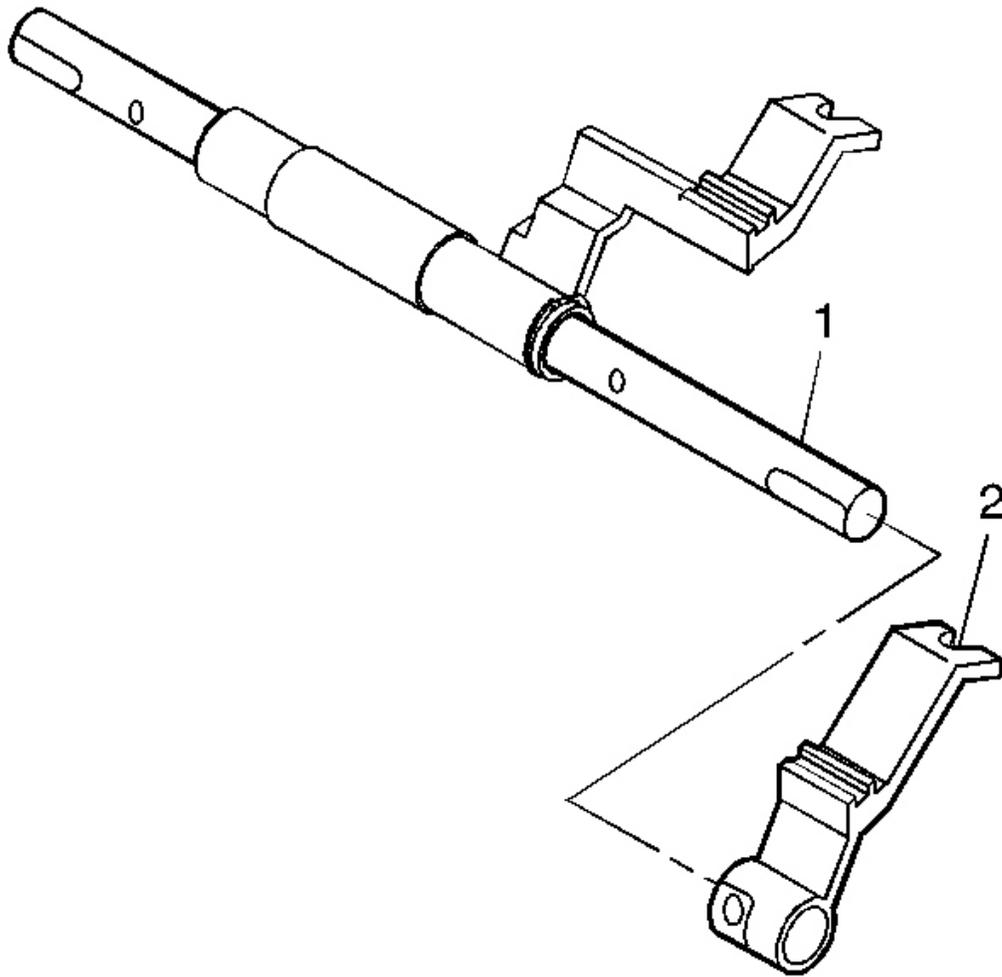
Installing/Removing Reverse Shift Lever Onto Shift Shaft
